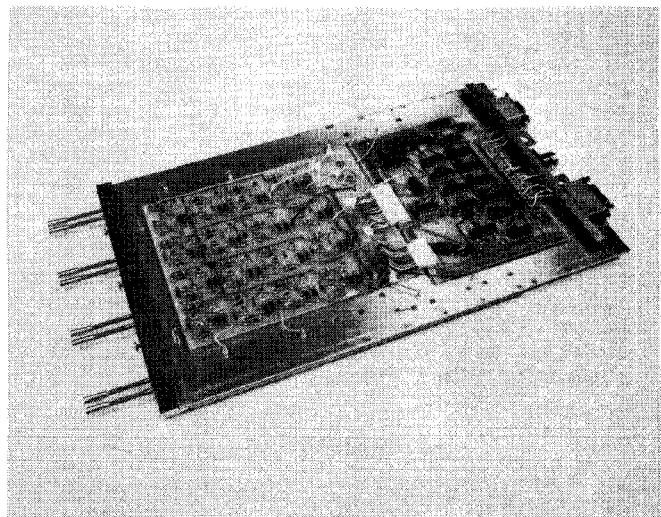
LOGIC-DRIVER ASSEMBLY
